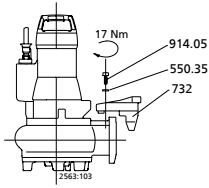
Fastening the claw for single guide rail and guide hoop arrangement
